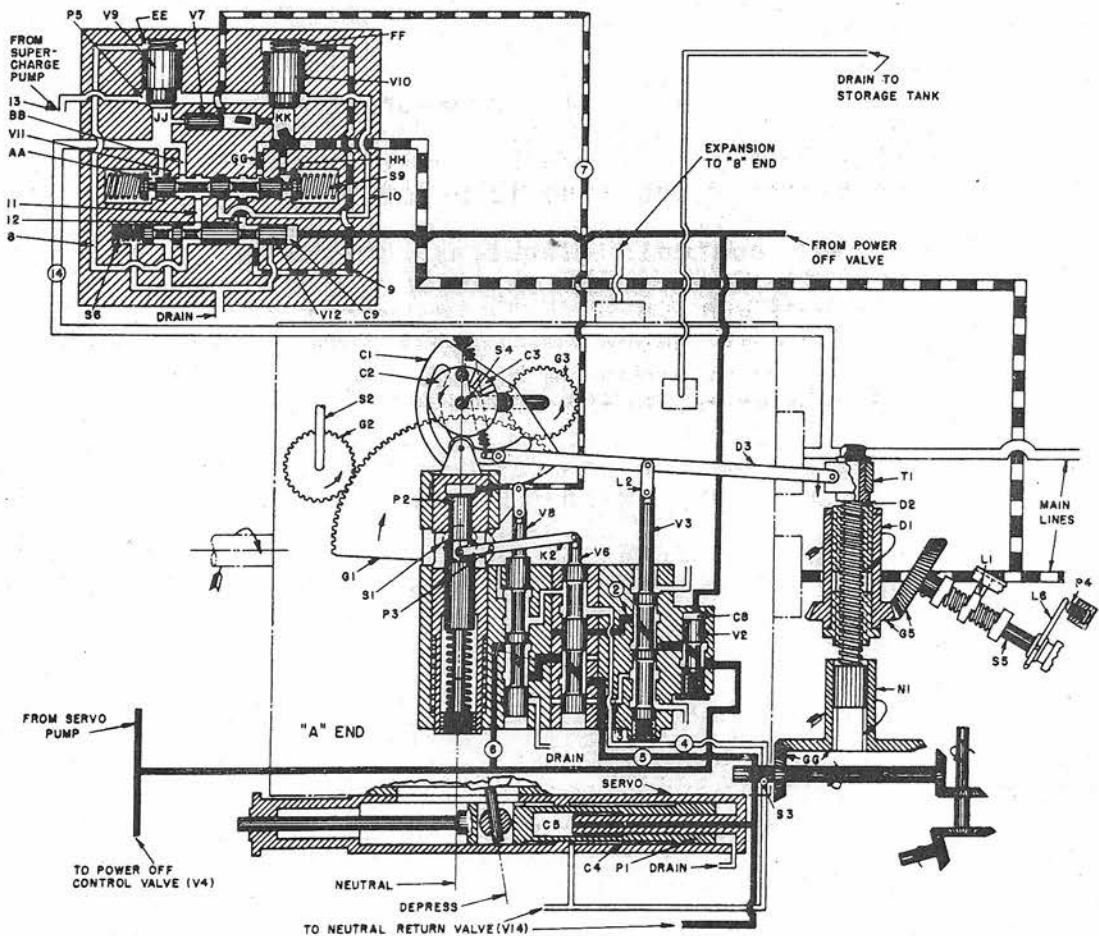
Elevating Gear Circuit Diagram (No. Pump Co.)
